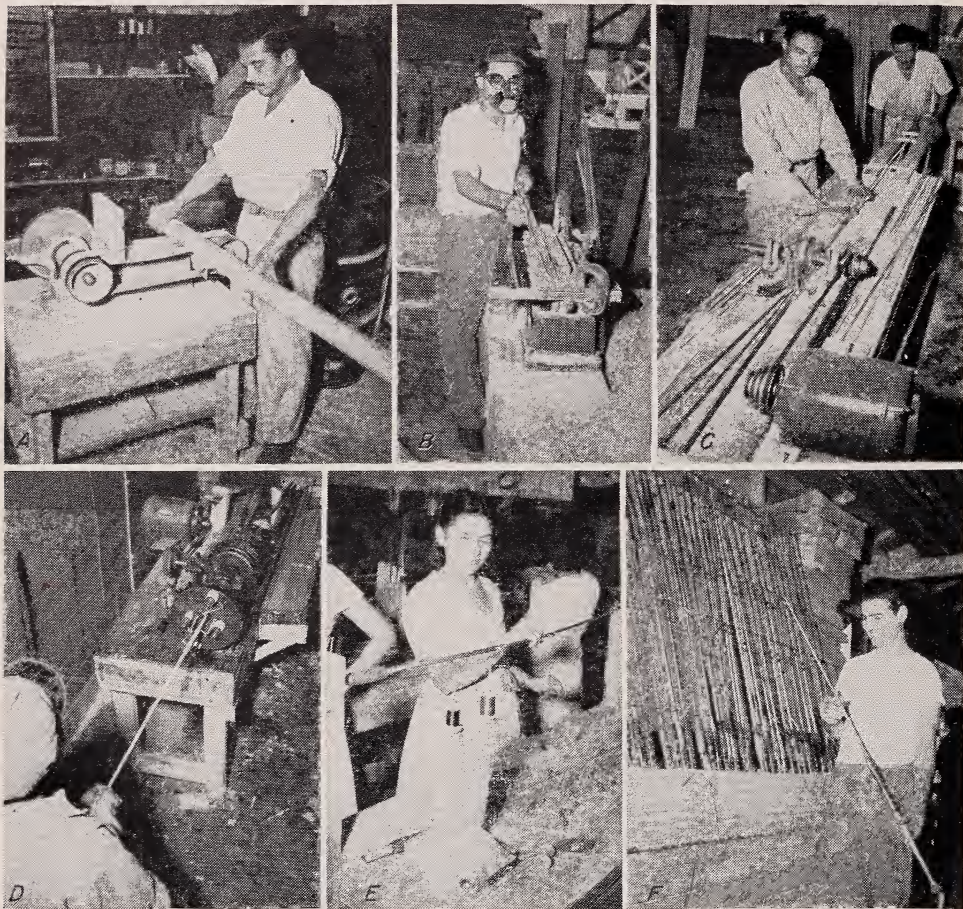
The manufacture of split bamboo fishing rods requires special machines. (A) Sanding culm nodes; (B) sawing strips; (C) planing a strip to a triangular shape, (D) tying glued sections, (E) tying "eyes" on rod, and (F) finished rods. (Courtesy of Harry M. Keller, Wendt & Campbell, Inc., Mayaguez, Puerto Rico.)
